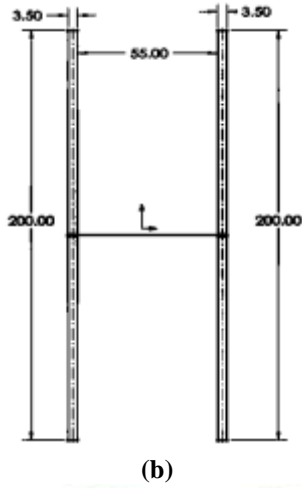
(a) Side View (b) Top View (c) Fabricated Winder Base
